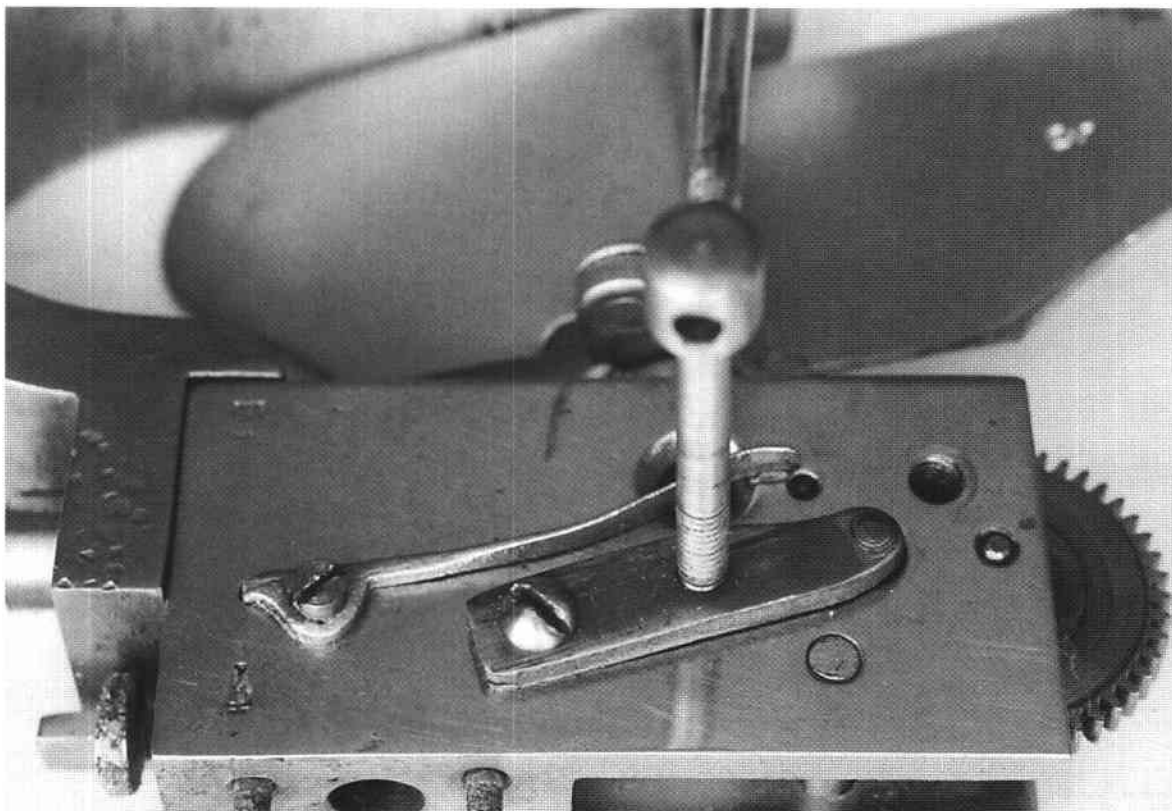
Spring steel bar and pad retracted, control lever upright. The track of the pad can be seen on the gear wheel.
